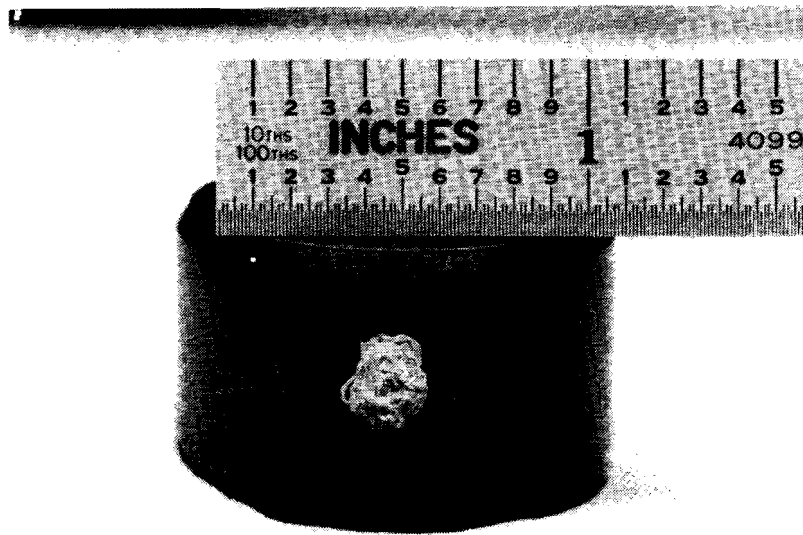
90-Degree Gearbox -450 Pinion (Inner Roller Race)
